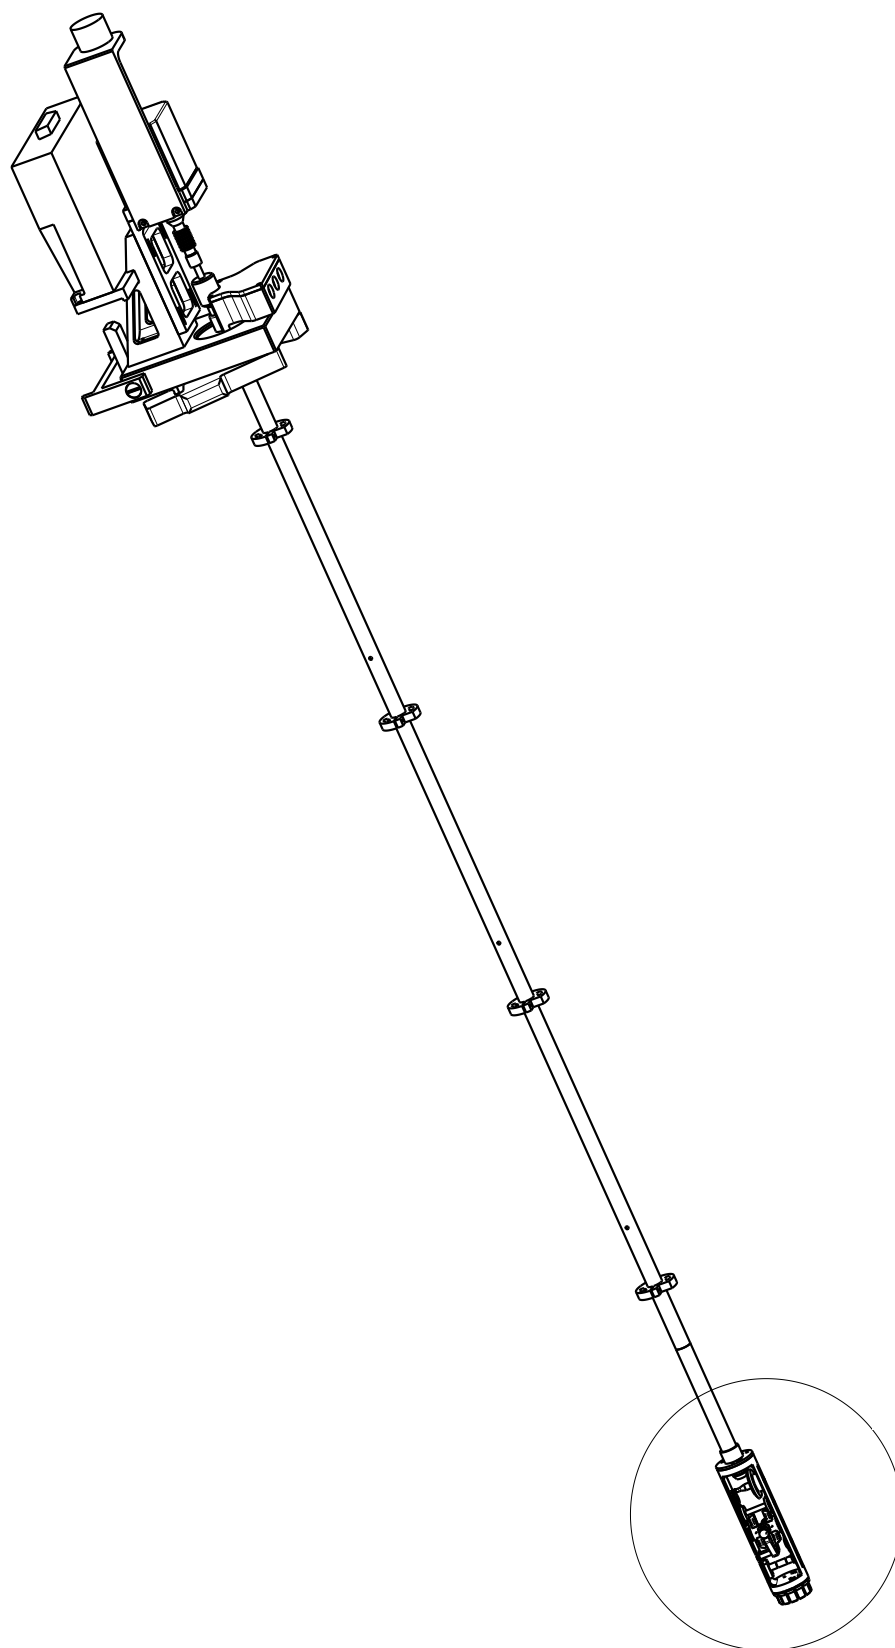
Global view of the new torque assembly. The motor and its controller are on the top of the rod, outside the cryostat. The circled part is shown in detail in Fig. 2.8.
